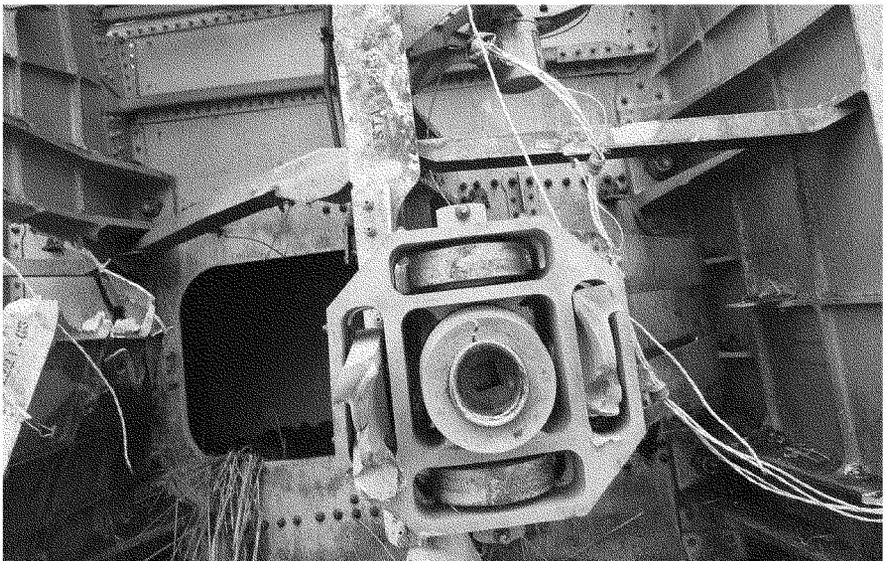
Overload failure of the vertical stabilizer. (Source: Dutch Safety Board)
